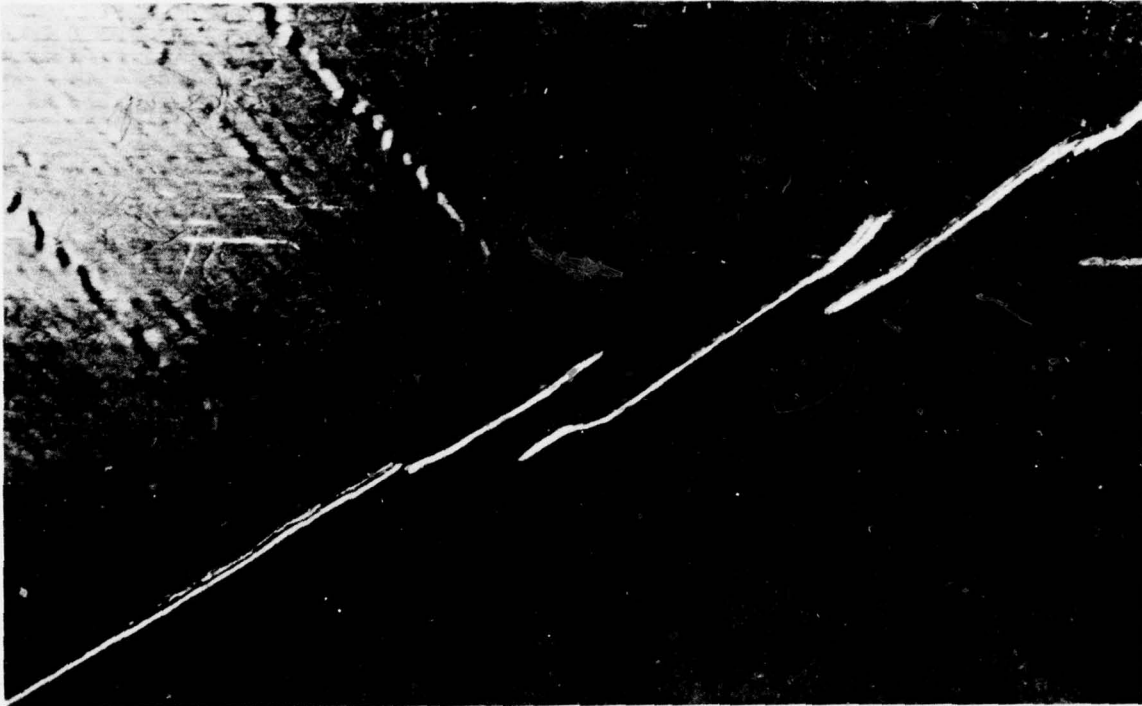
Close-Up of Skin Dimples in Left Skin
